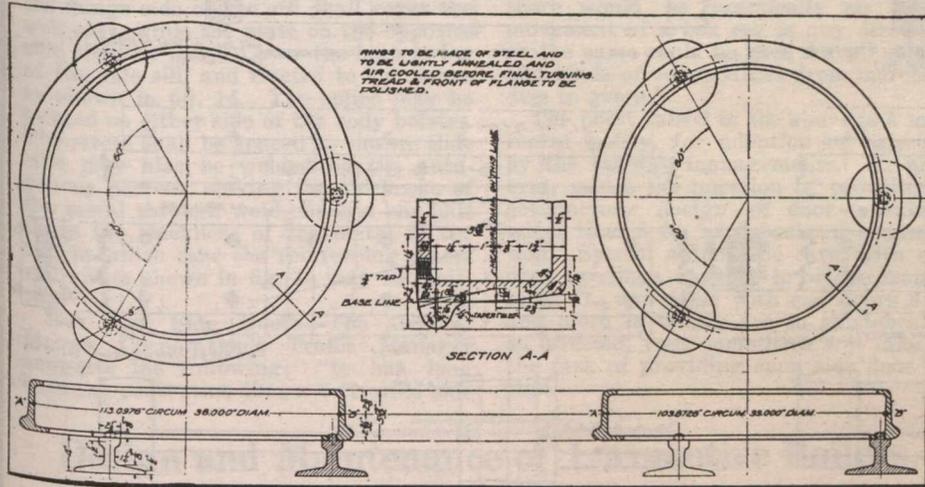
Wheel Circumference Measure Test Rings for 33 and 36 in. Wheels.
